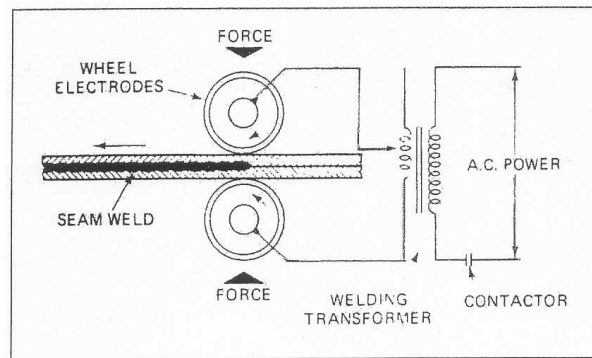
Process of Seam Welding((MEC2202)Manufacturing Process Study Book)
